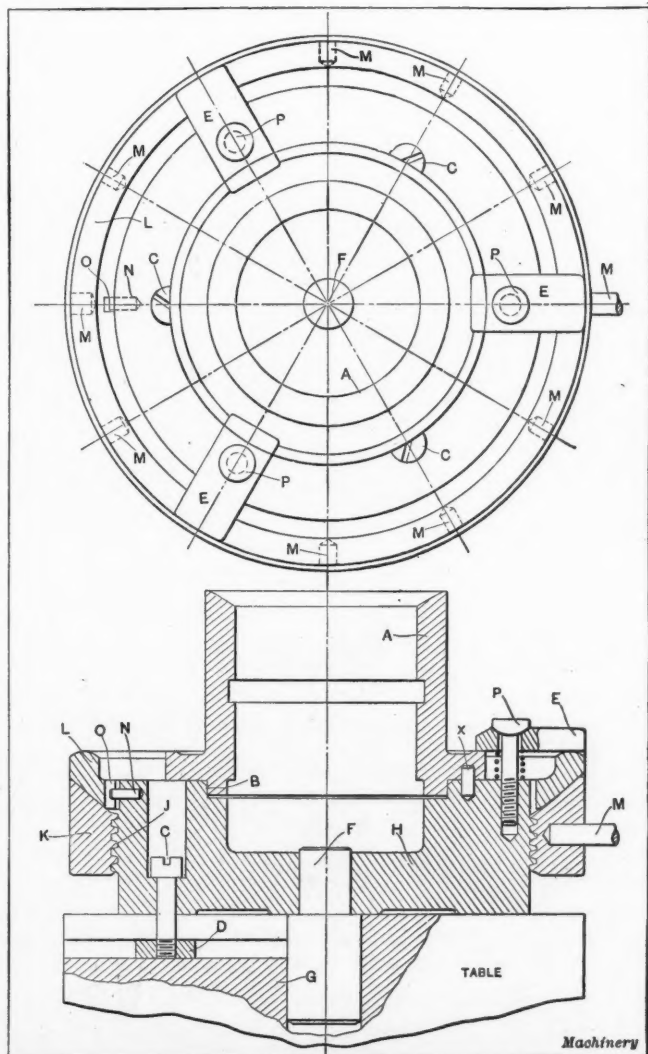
Another Example of Equalizing Clamping Fixture used on Vertical Turret Lathe
